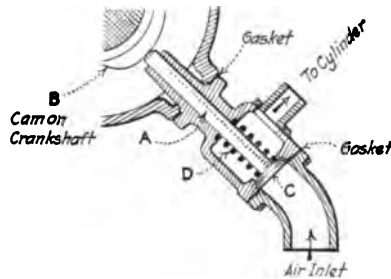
Fairbanks-Morse Co. vertical air starting valve.
